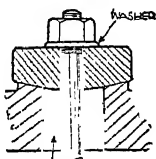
(Left).—The central hole should be large enough to clear the clamping nut.
